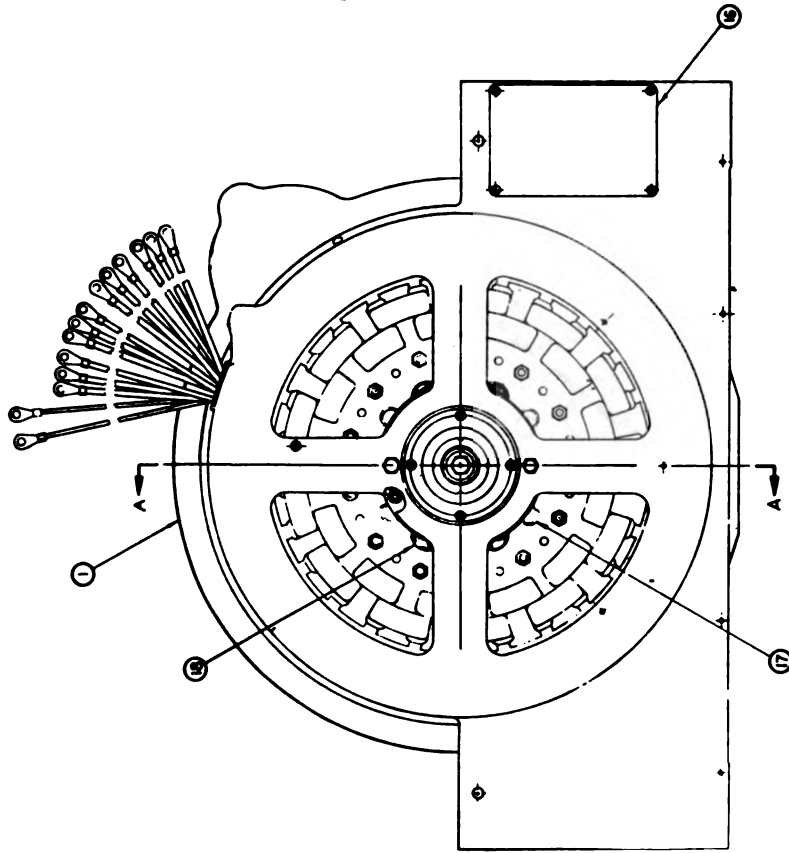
Hol-Gar model SP-HF-15, generator set, subassembly, right side view.
